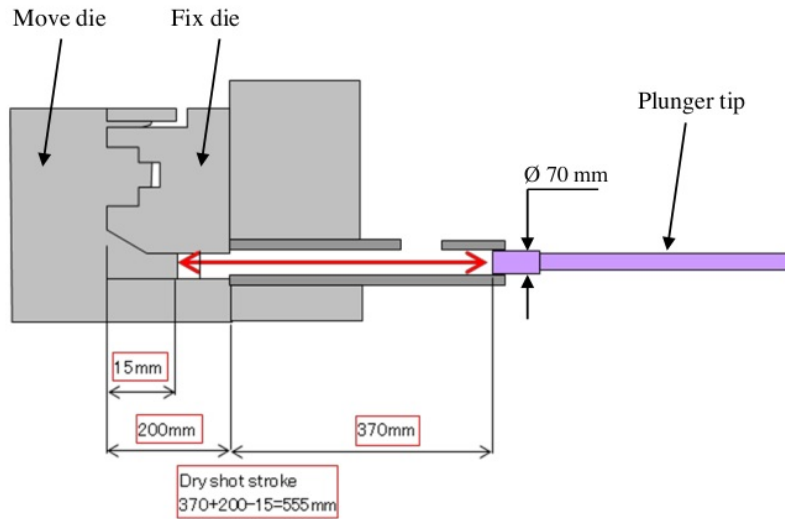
Injection system of molten Al alloy into metal mold using HPDC process.
